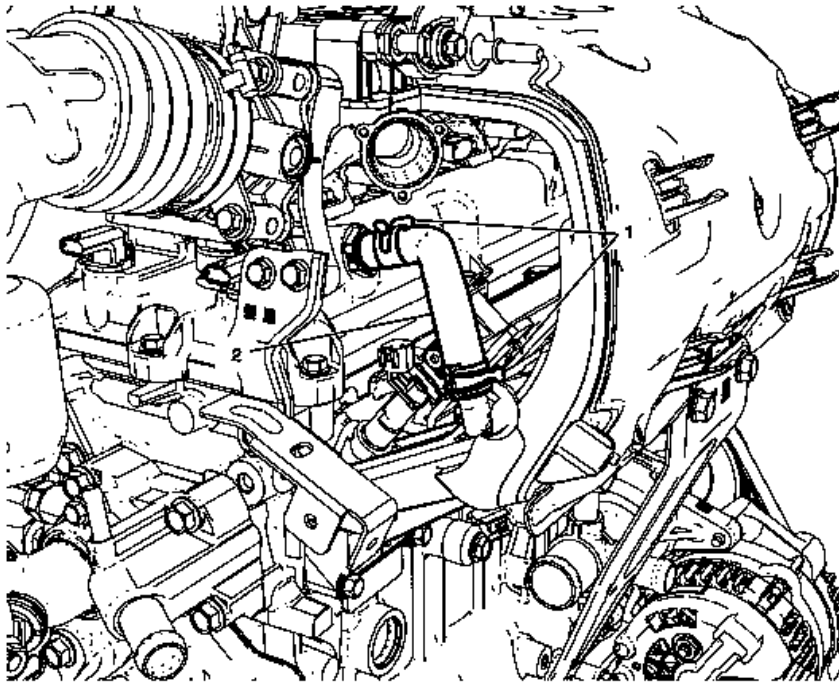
Positive Crankcase Ventilation Hose/Pipe/Tube
